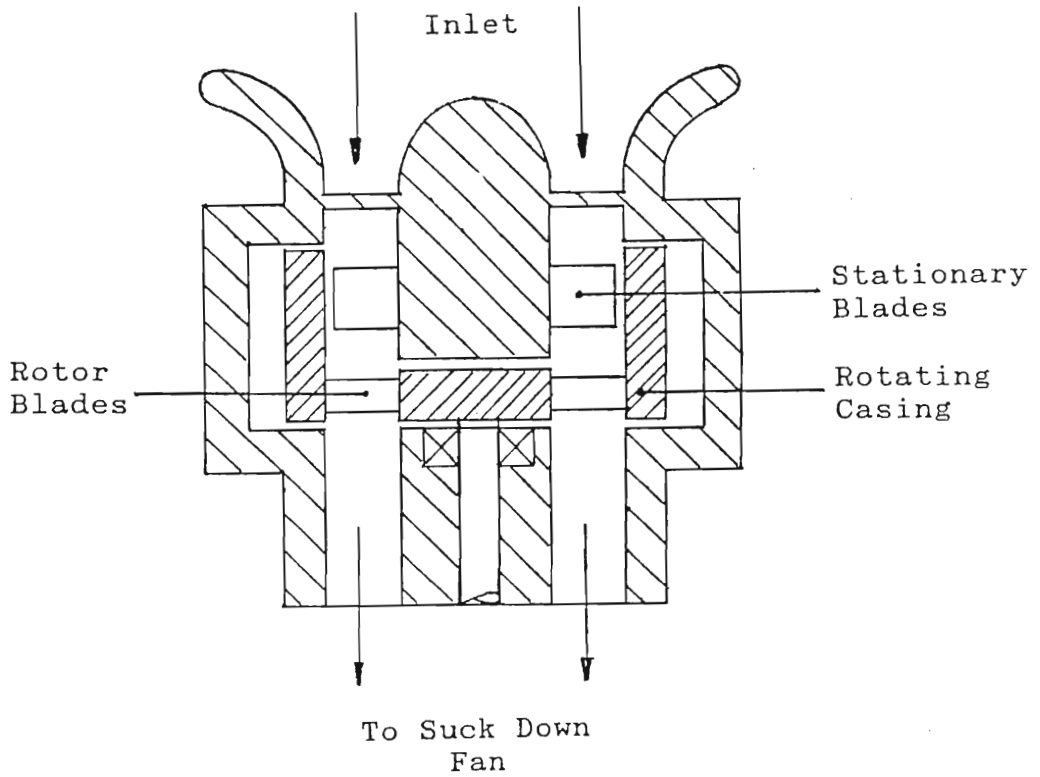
ROTATING CASING TURBINE RIG SCHEMATIC
